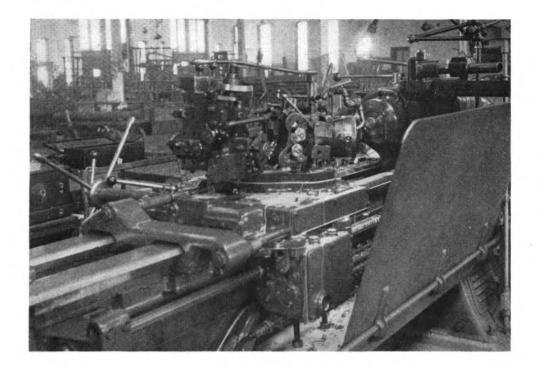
One of the new J. G L. 2½-in. turret lathes used in machining engine bolts from bar stock
